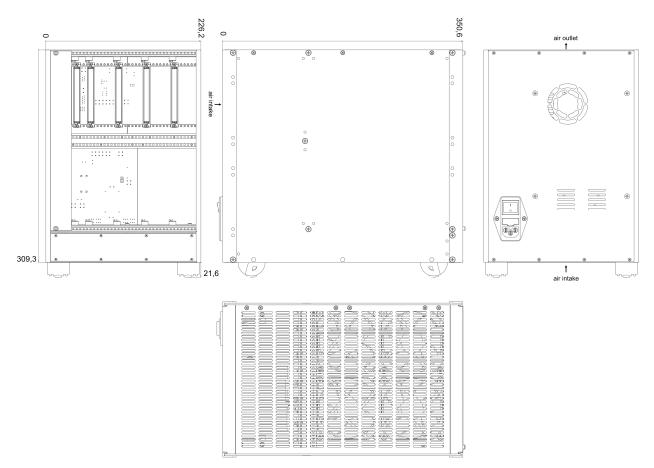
Dimensional drawing ECH 244 - 4 channel MMS HV crate
